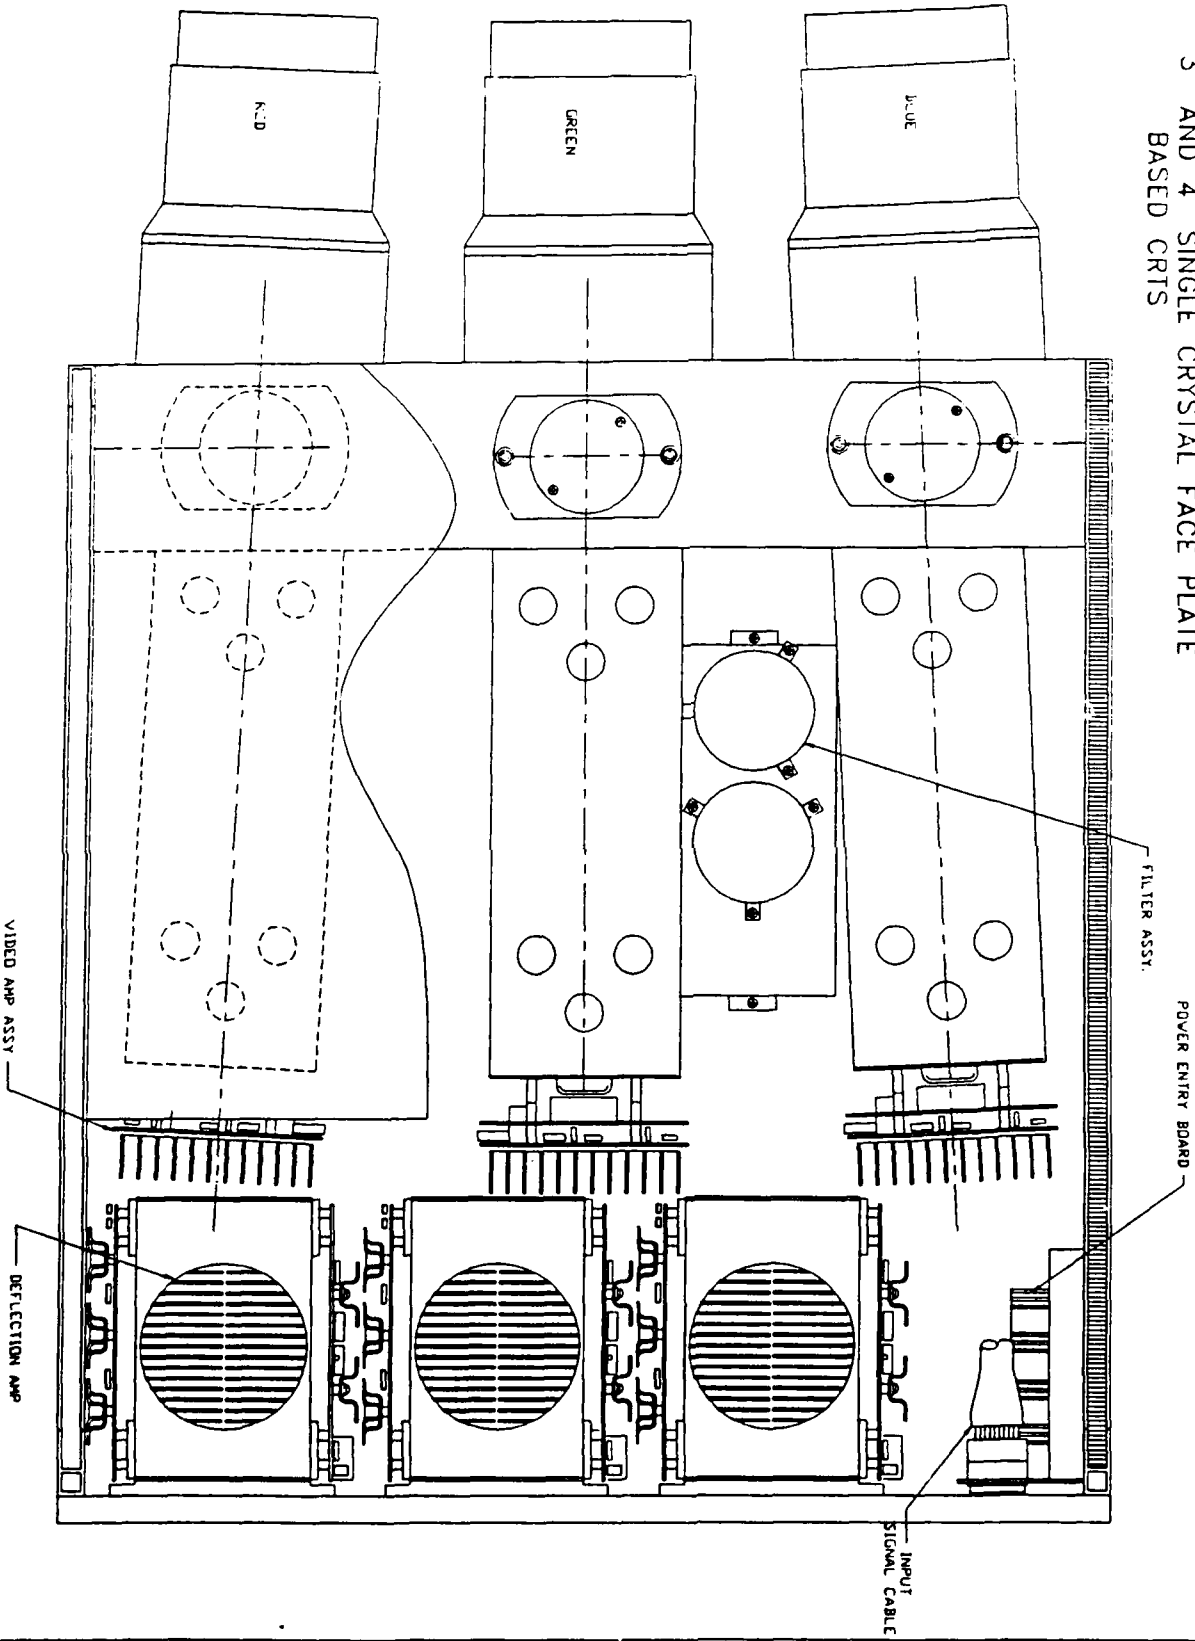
Head Assembly -- T1080 R/C Compatible 4" Single Crystal Faceplate Based CRTs
